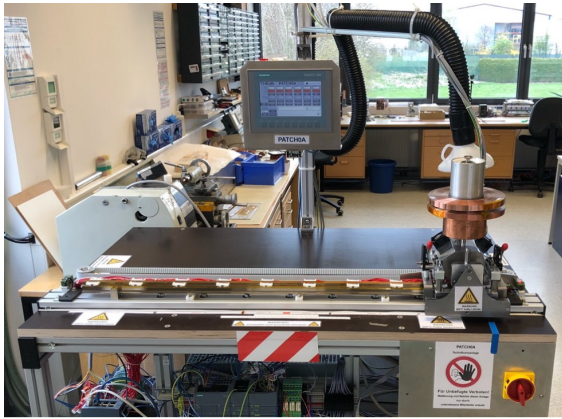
Machine used to solder the bare tape and shunt together on small lengths. Courtesy of THEVA.
